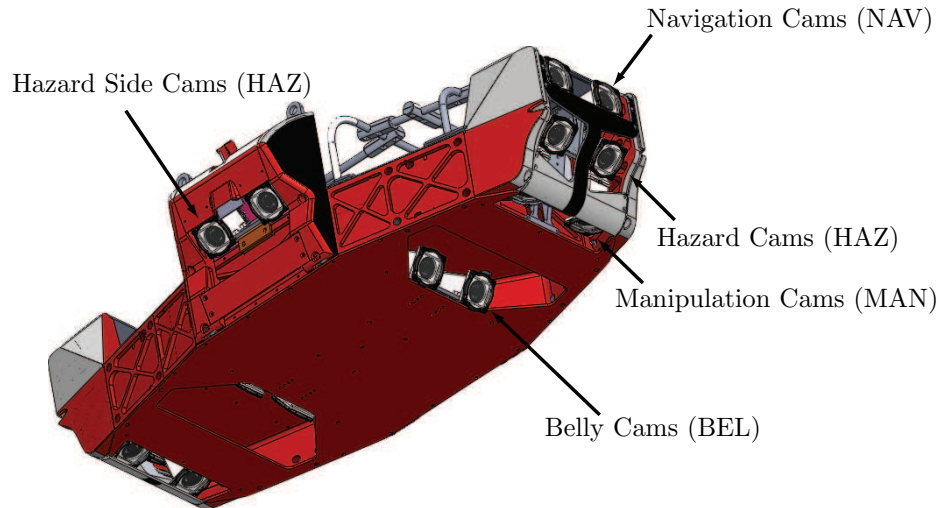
RoboSimian chassis with the designed stereo camera layout.
